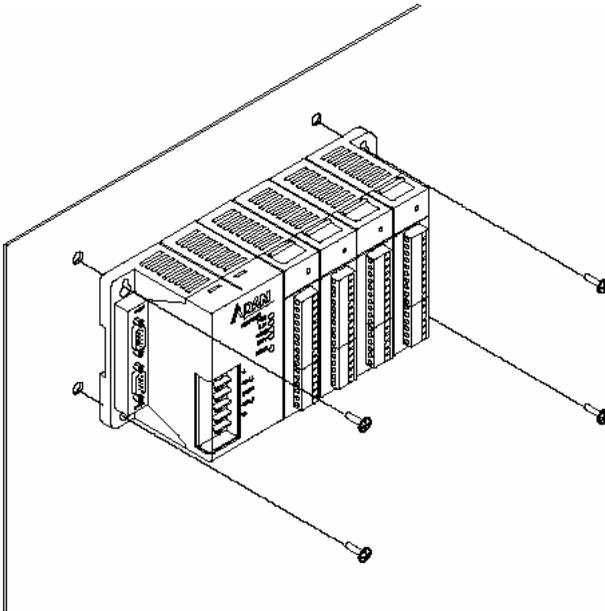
Panel mounting screw placement for (ADAM-5510KW)
